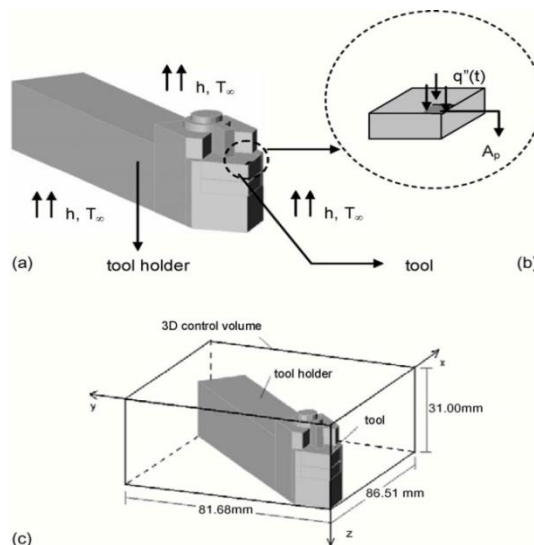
Thermal problem scheme: (a) tool and tool holder assembly; (b) interface heat flux detail; (c) 3D control volume
